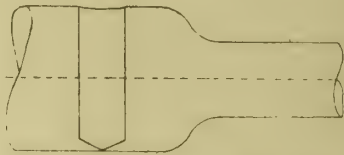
SECTION OF TEST BAR ABOUT SHOULDER, SHOWING THERMOMETER HOLE.
